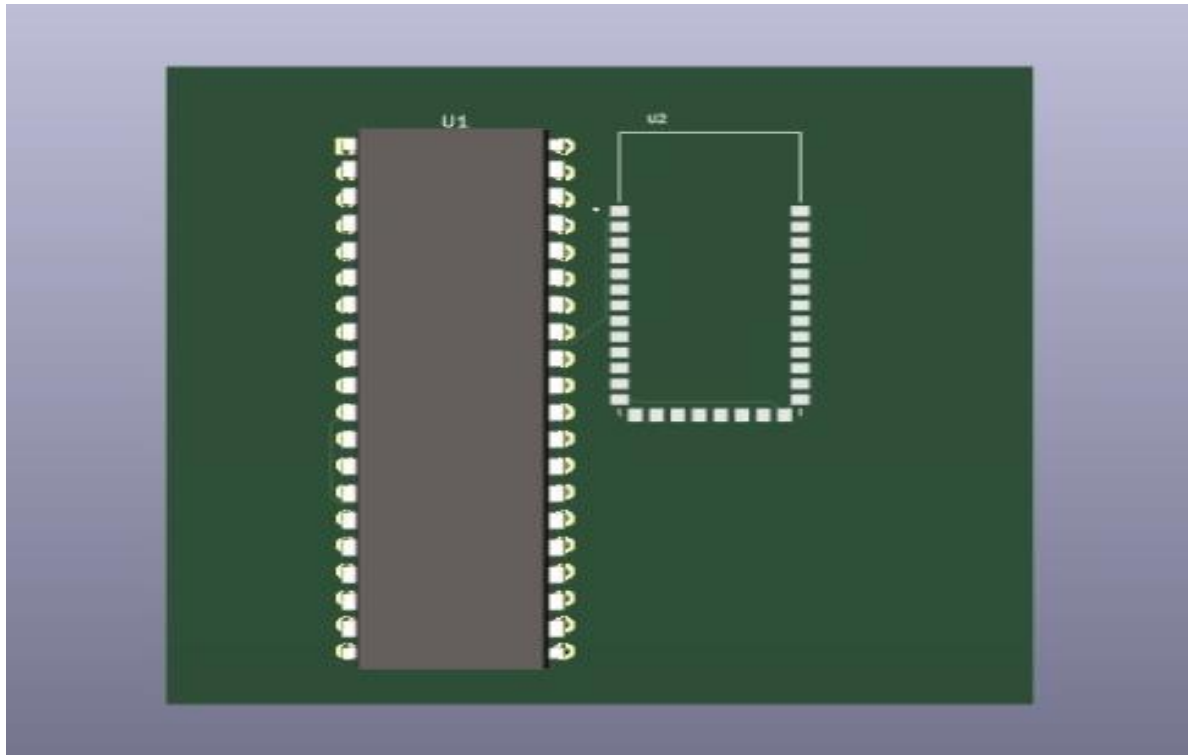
Component View of HC-05 Bluetooth Module PCB Design
